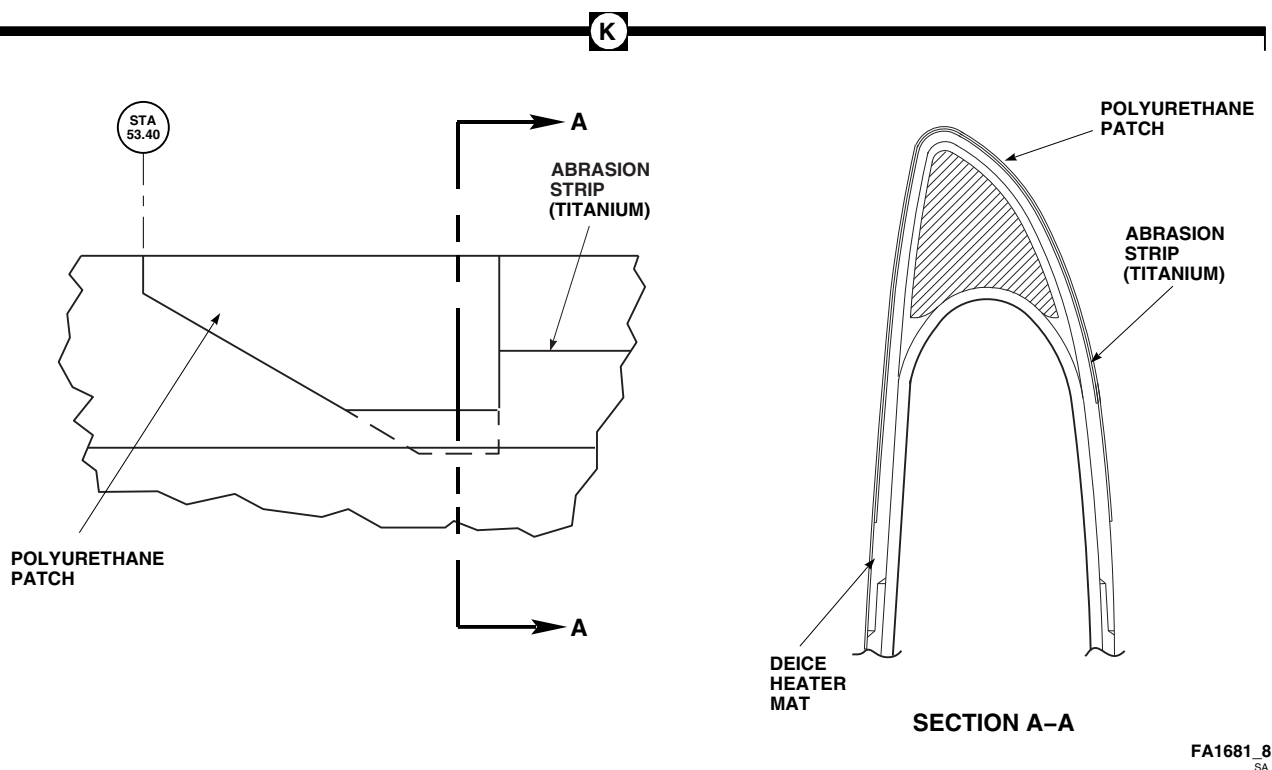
MAIN ROTOR BLADE INSPECTION AREAS (SHEET 8 OF 8)
